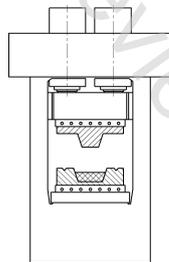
Compression moulding machine shown with mould open and loaded with moulding material
